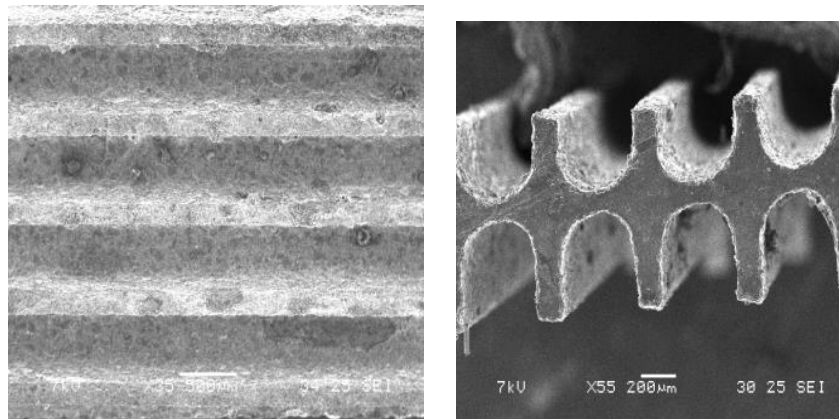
Top and side view of DL-MC fabricated by wire-cut EDM
